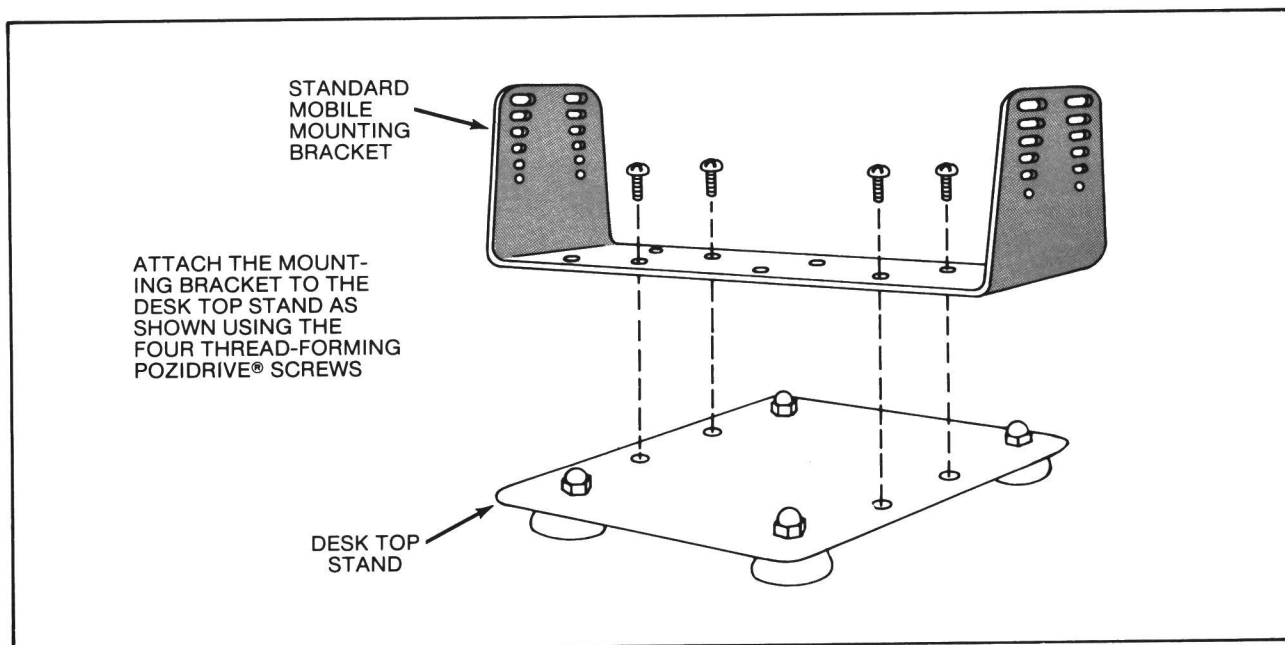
Mounting Mobile Bracket to Desk Top Stand
